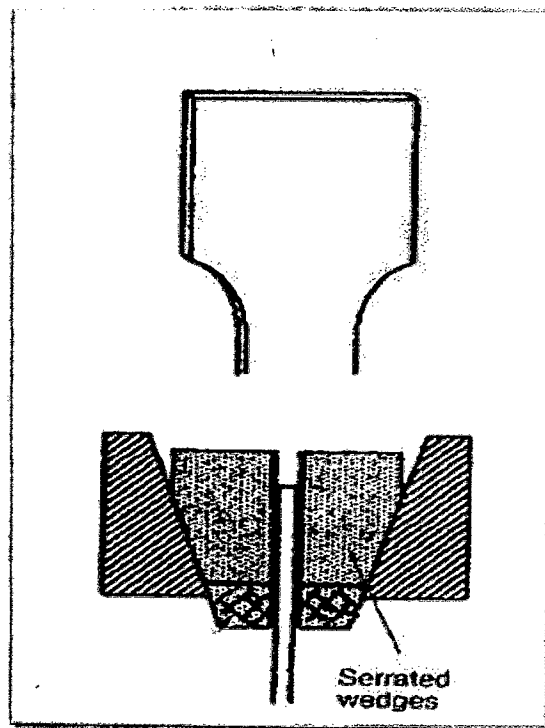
Coupon Test Specimen is gripped with serrated wedges
